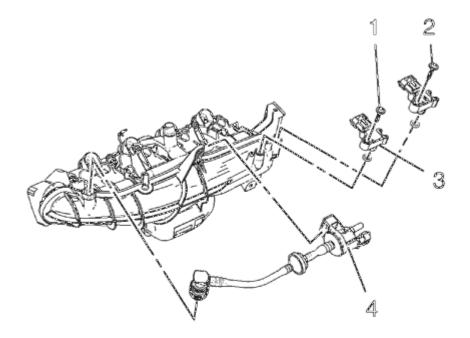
Intake Manifold Sealing Surfaces Courtesy of GENERAL MOTORS COMPANY
